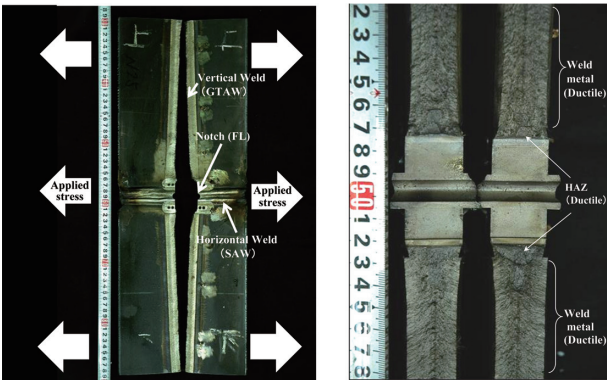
Fracture path and fracture surface of cross weld notch wide test (Heat A, 25 mmt)
